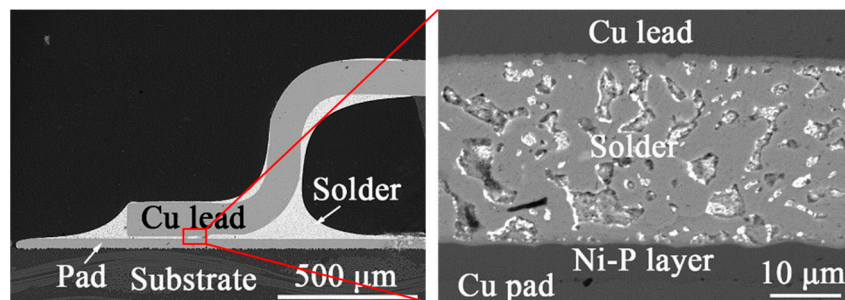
The cross section of Sn-37Pb solder joints after reflowing.
